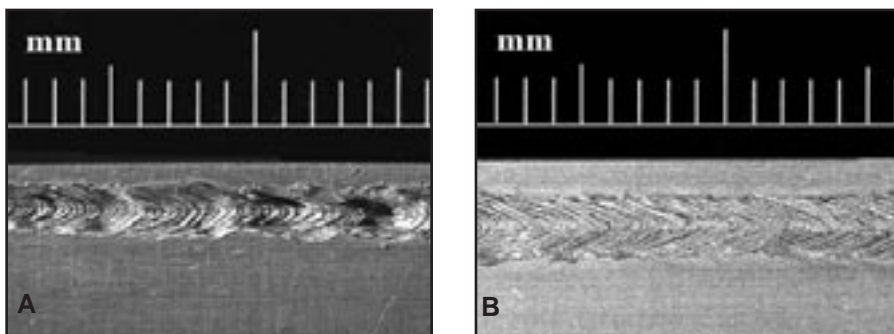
Complete-penetration butt-joint welds of aluminum (5083 aluminum alloy, 3 mm, CO₂ laser, 3.81 m/min). A — Single-beam laser weld (laser power: 3 kW); B — smooth, dual-beam laser weld (laser power: 4.5 kW).
